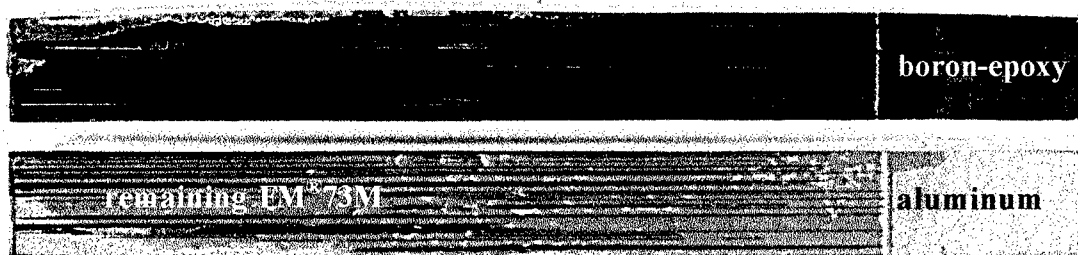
Fracture surfaces of the Al/FM[®]73M/B-Ep bonded system
